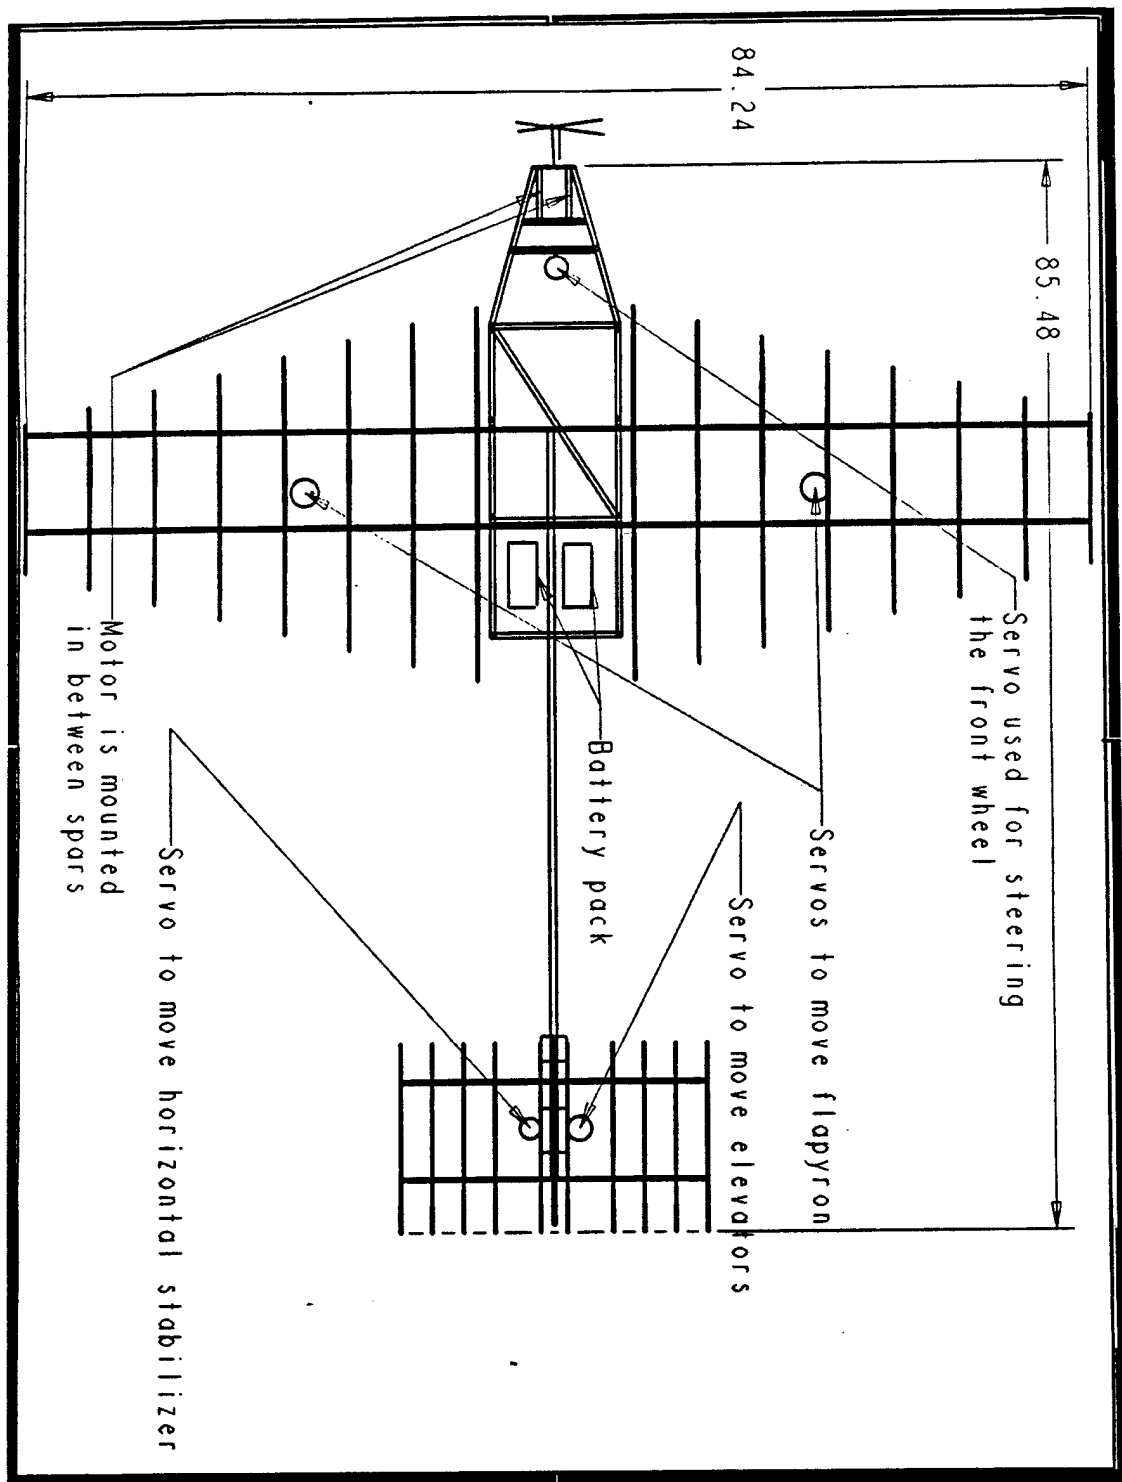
(c) – Tip View of Aircraft with Dimensions
